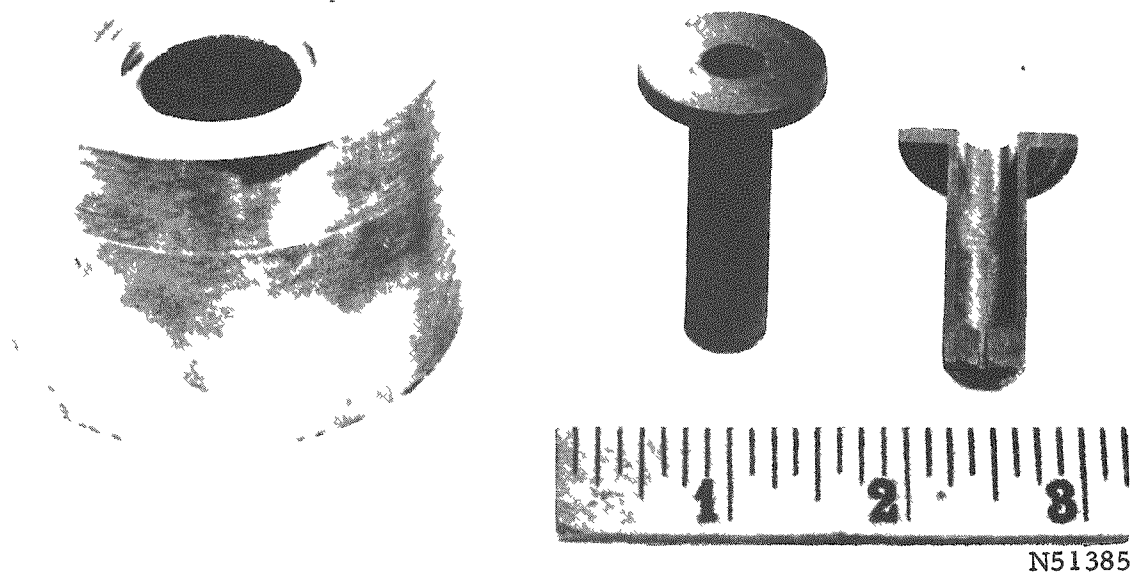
COPPER SUPPORT AND GRAPHITE THIMBLE MOLD FOR MAKING UC CASTINGS
